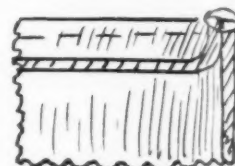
Lap joints as used in soldered, silver and spelter brazed and fusion welded seams.
